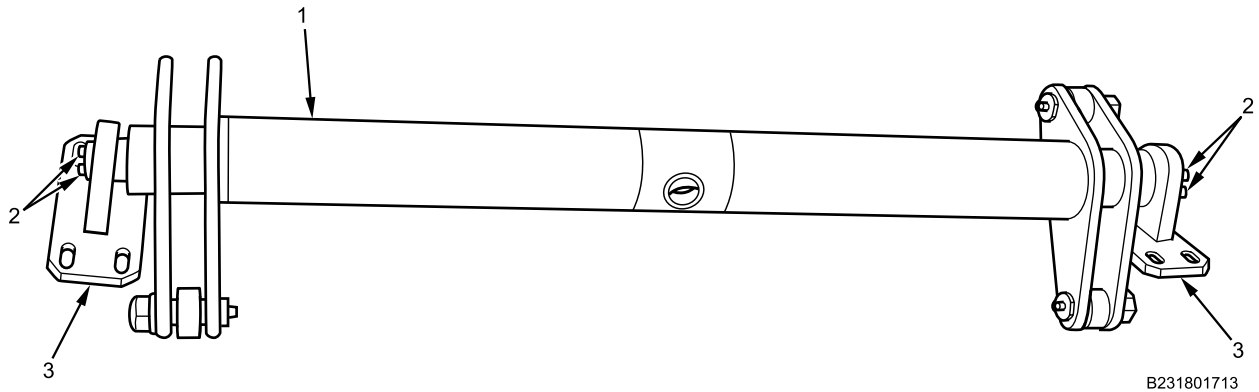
Mounting Brackets Installed on Rear Door Lock Assembly.
